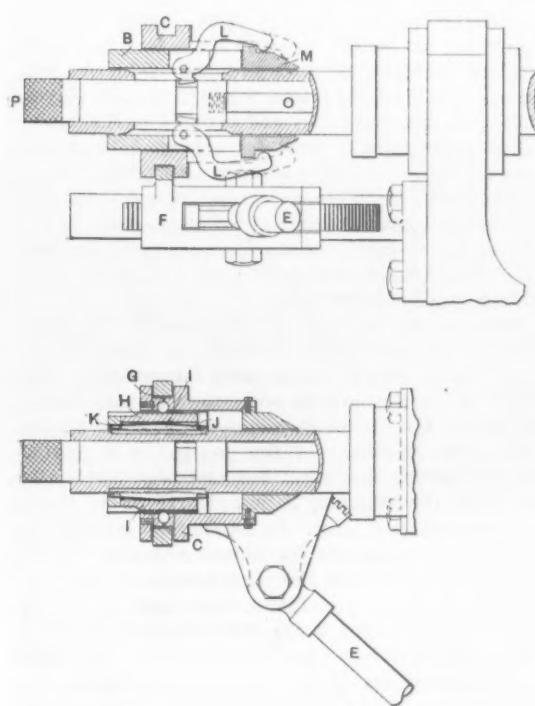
Side and Plan Views of the Mechanism at the Head End of the Lathe.
